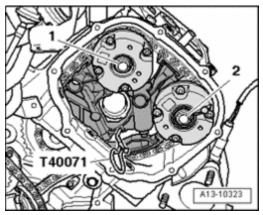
Identifying Bolts On Right Cylinder Head And Removing Both Camshaft Adjusters Courtesy of VOLKSWAGEN UNITED STATES, INC.
